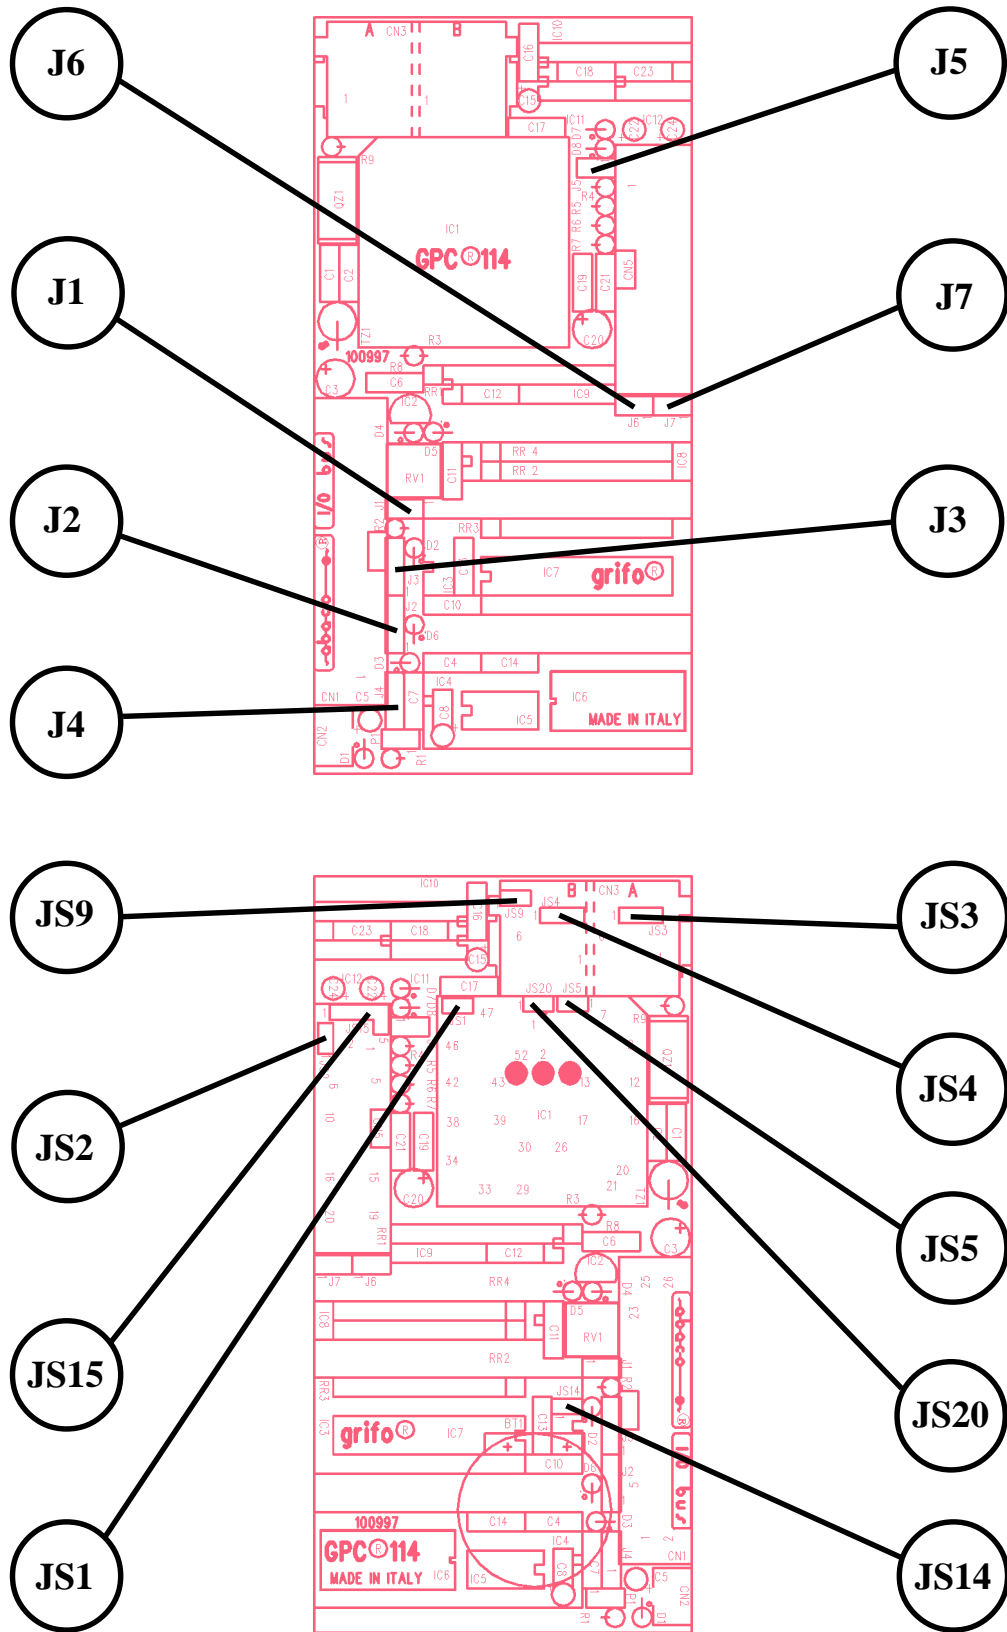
JUMPERS LOCATION (COMPONENT AND SOLDERING SIDE)
